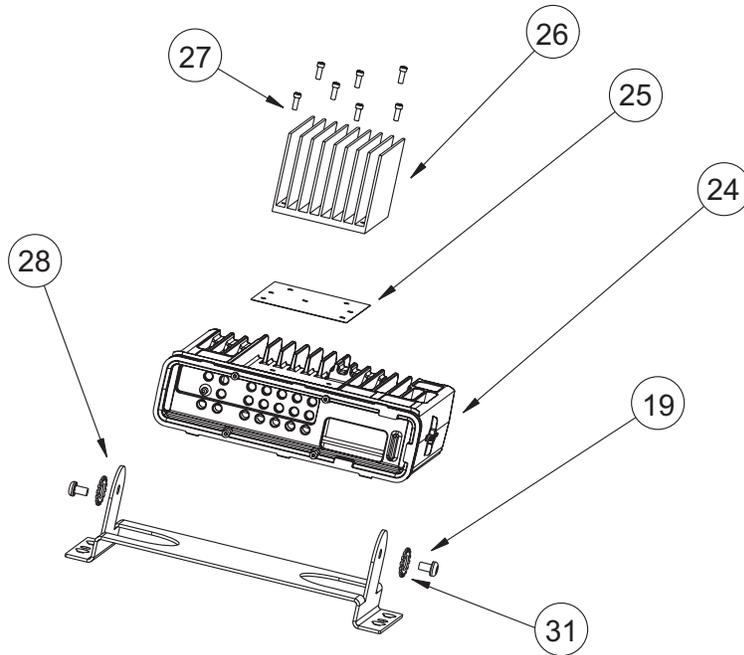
Transmit Bracket and Radio Assembly Exploded View
